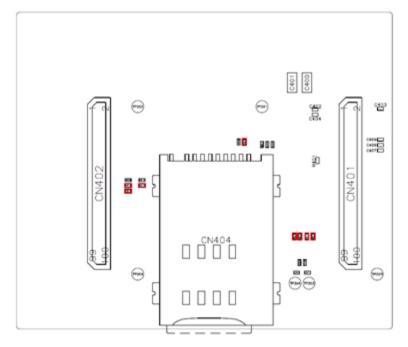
AirPrime SL8090 Socket-Up Board (Bottom View)
